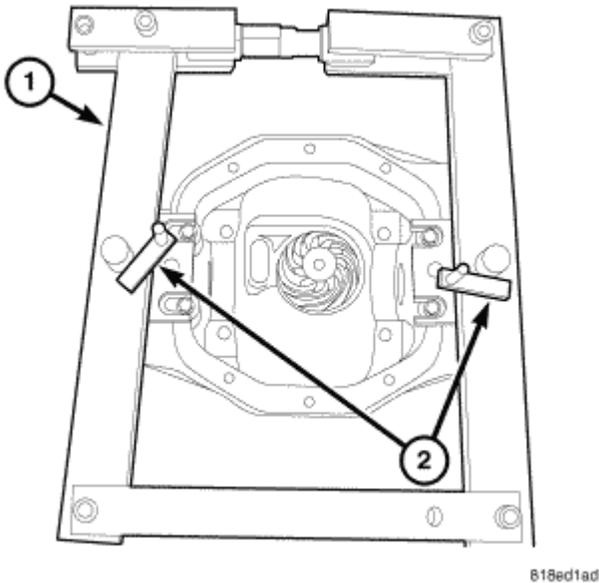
Identifying Spreader W-129-B & Spreader Retainers W-129-1
